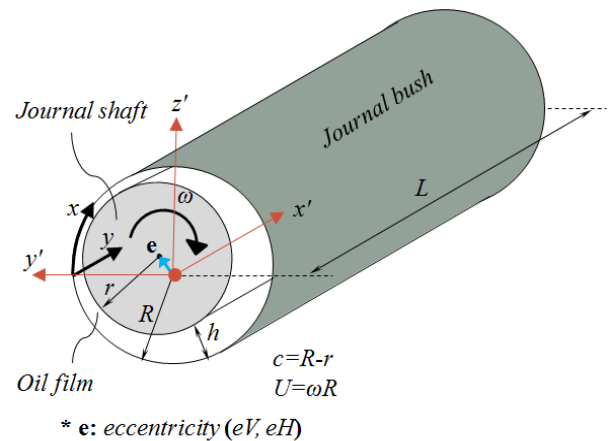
Schematic diagram of propeller shaft and bush of sterntube journal bearing in dynamic rotating condition
